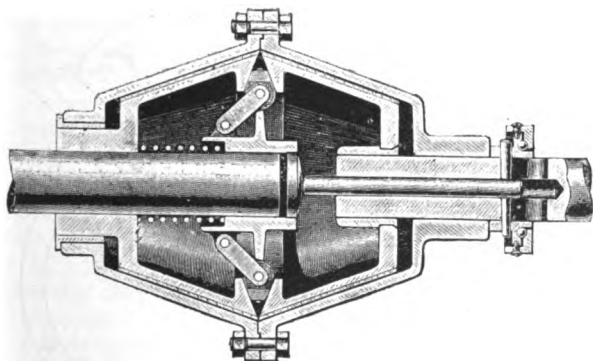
SECTION OF DOUBLE CLUTCH.—TURGAN-FOY CAR.
